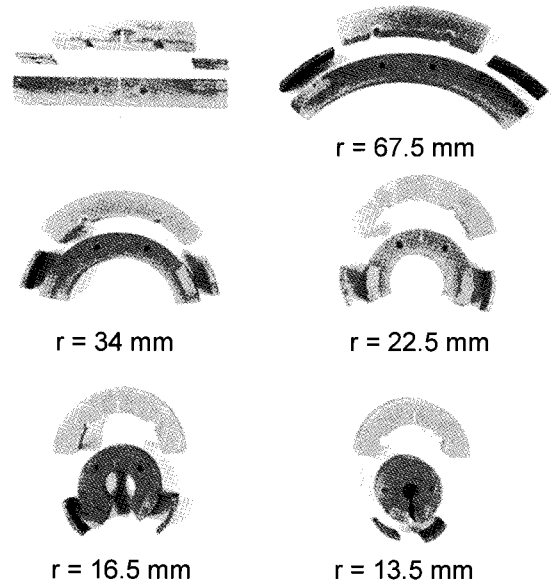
Views of a series of FRP sample holders with mechanical fixing in the easy bending mode.
